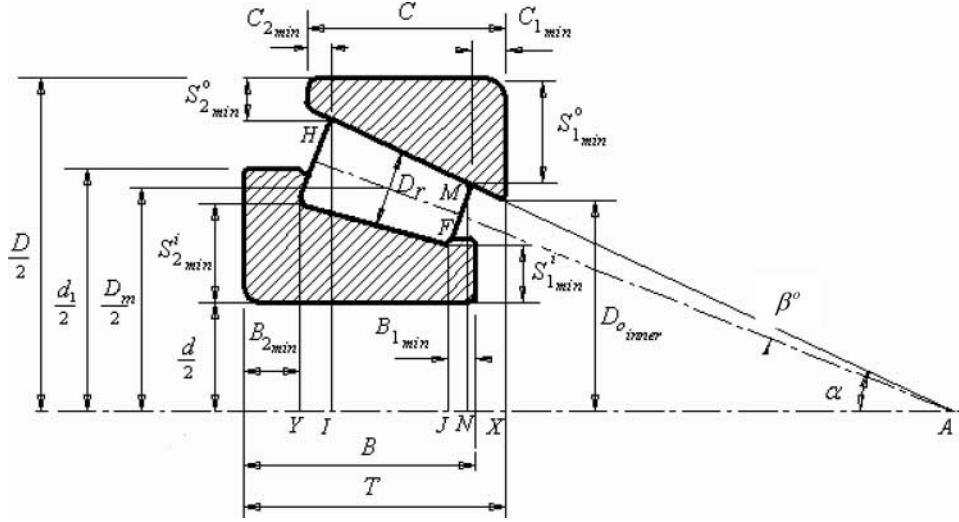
The sectional view of a tapered roller bearing with the cup, cone, and roller.
